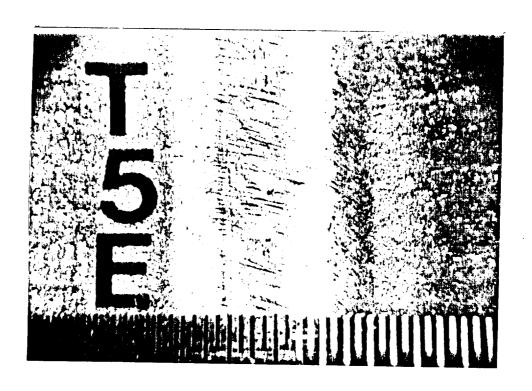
B. Weld made with 325 ppm Nitrogen in shield. Keyhole. Back.
